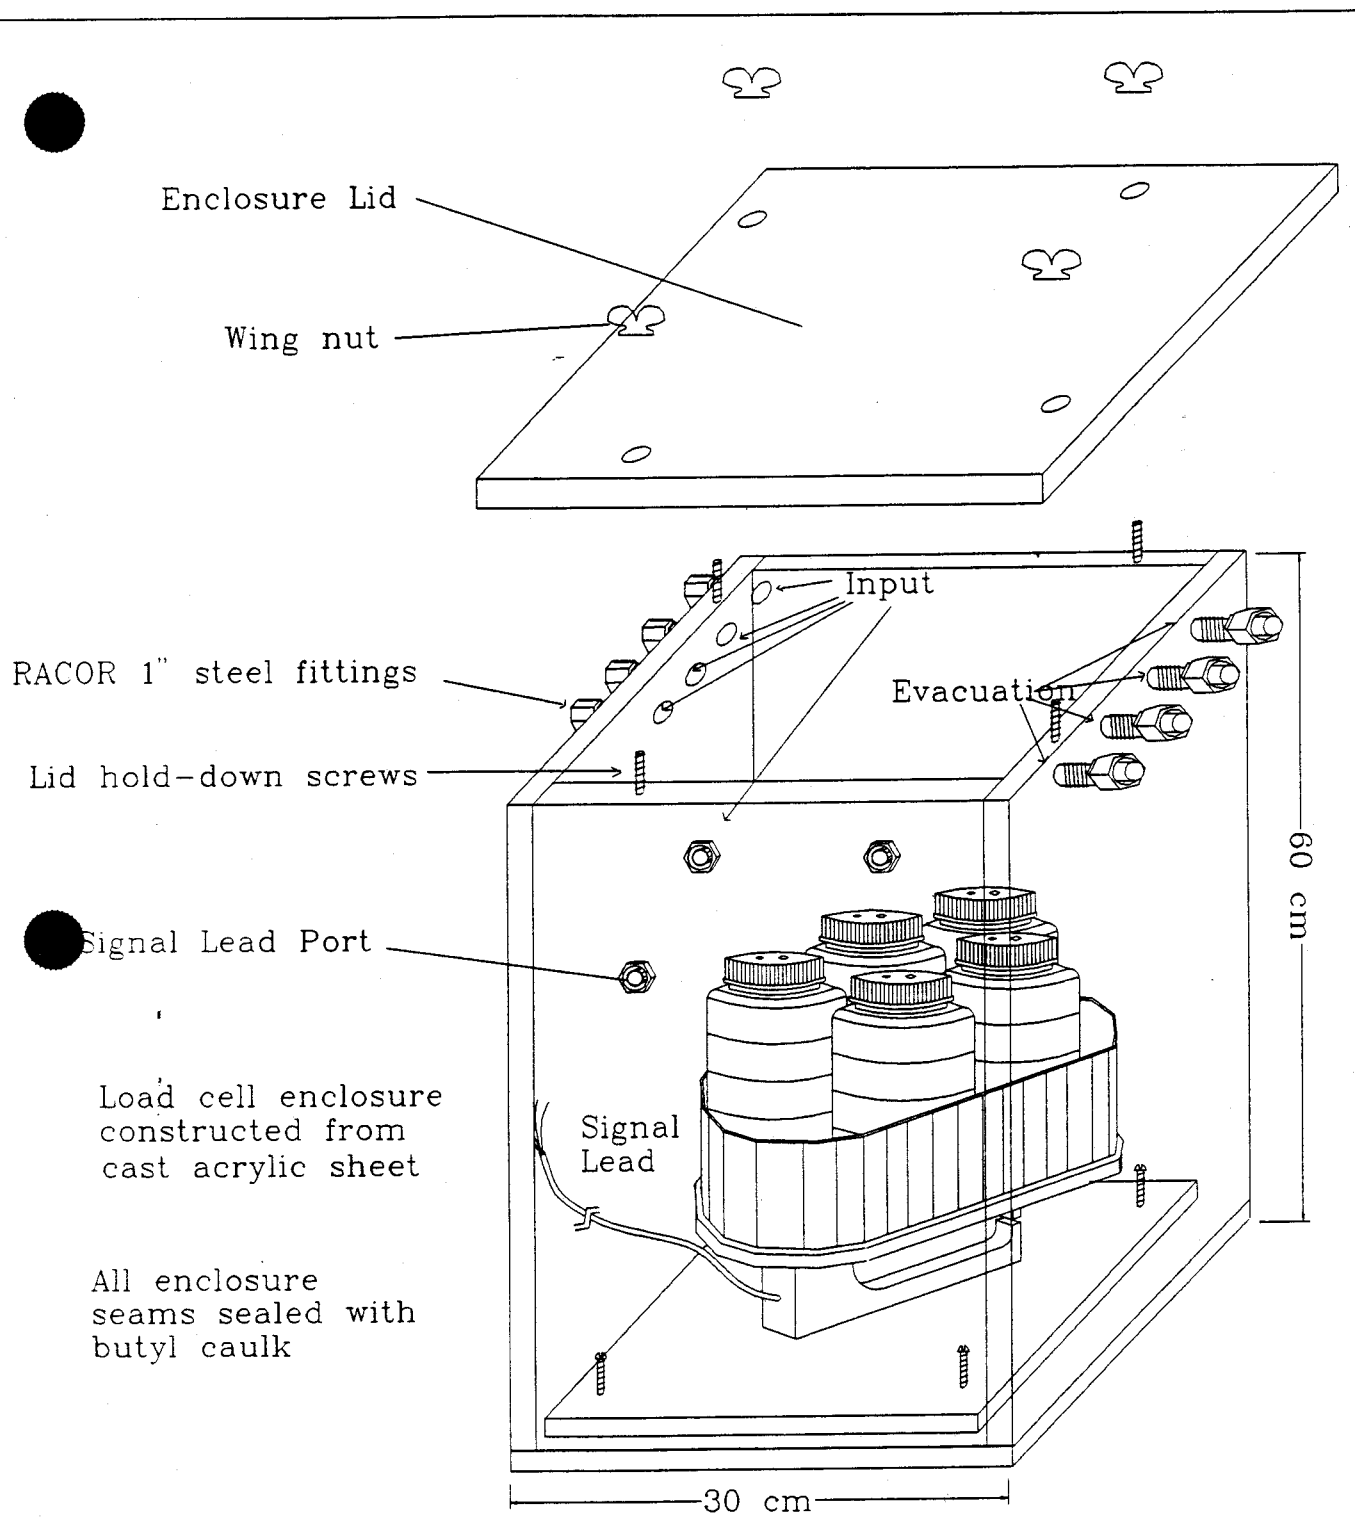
Load Cell Assembly and Enclosure
